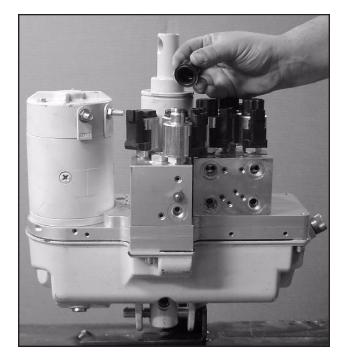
Remove the "S1" Coil using your hand or carefully use pliers.
